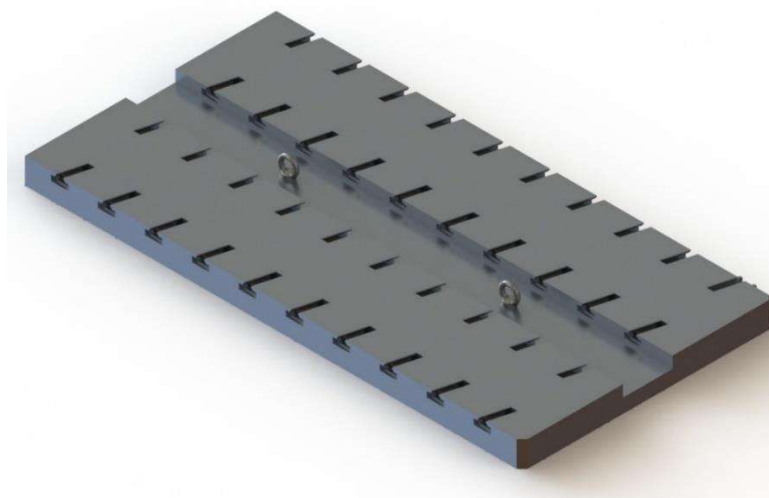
1<sup>st</sup> Stage Tool with Lifting Eye Bolts
